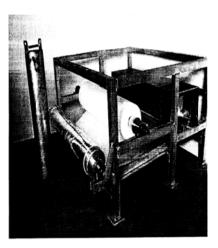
MLI wrapping machine & copper sleeve assembly[6]
